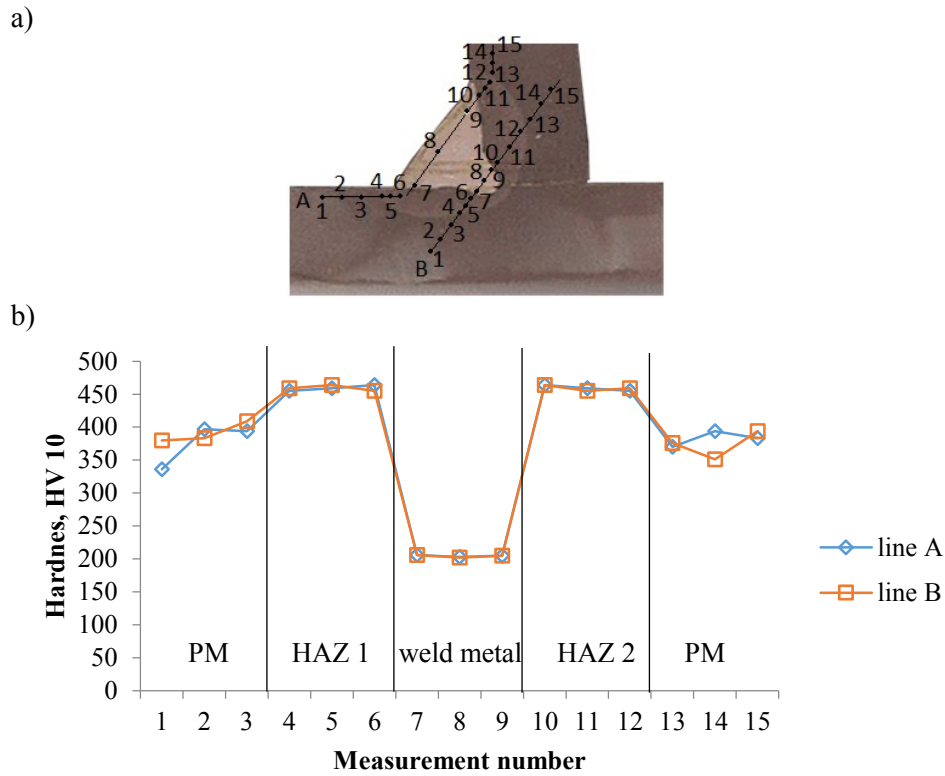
(a) Macrostructure and (b) hardness value distribution on transverse cross section of the welded tee joint of 8-mm thick Armox 500T steel plates made with the use of fillet weld
